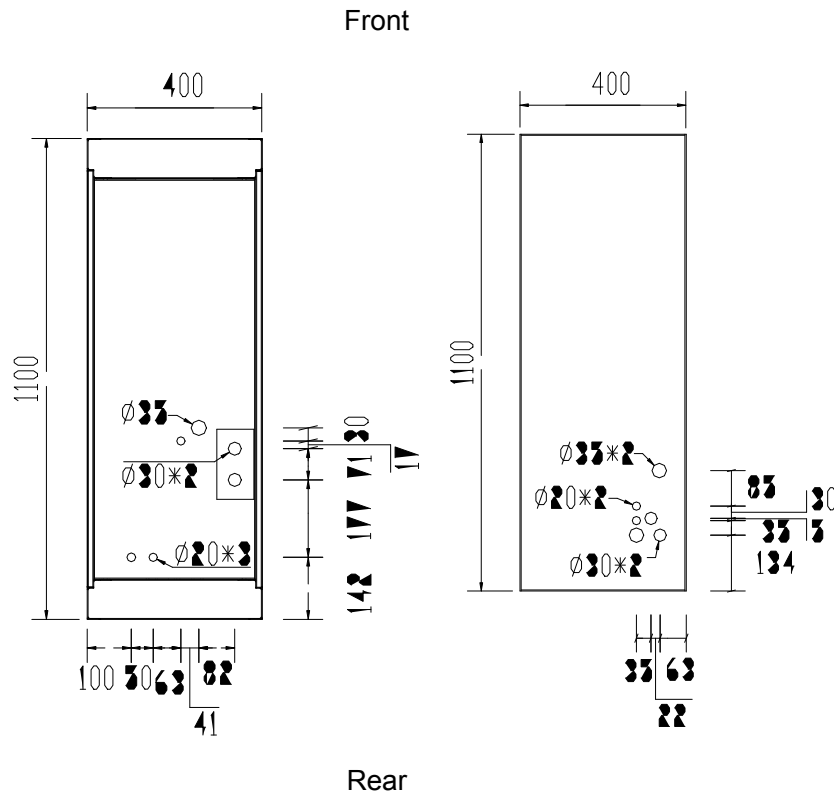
Dimensions of the Top Panel and Bottom Panel in 400mm front discharge unit (Left- Top Panel; Right- Bottom Panel)
